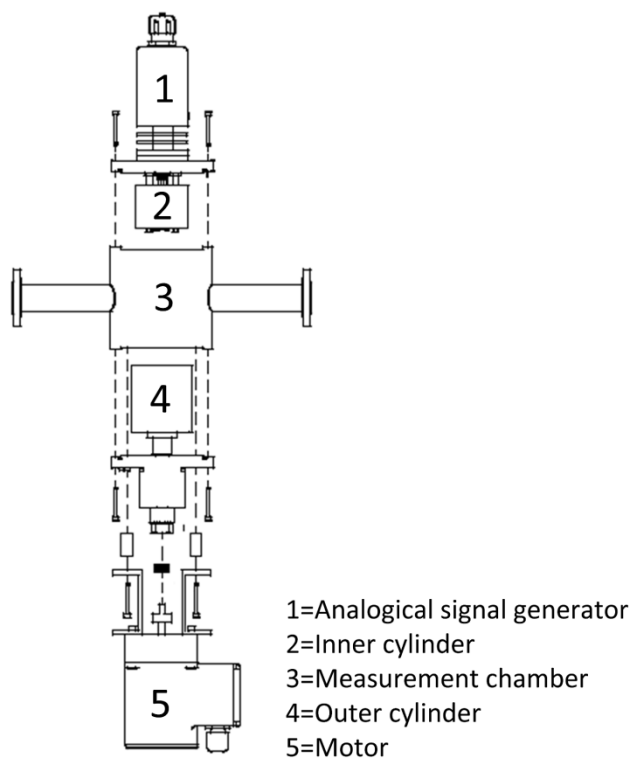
Viscometer BROOKFIELD, model TT-100, original motor.
